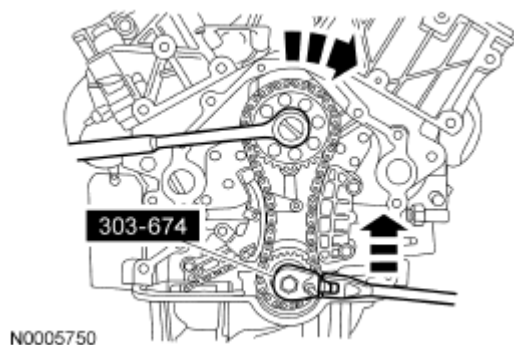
Using Special Tool To Prevent Crankshaft From Turning
